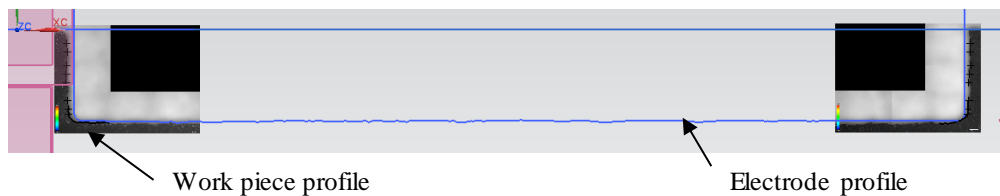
Example of the superposition of both electrode and workpiece profiles.
